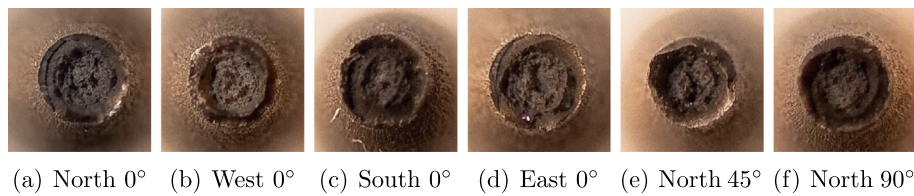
Fracture surfaces from different tensile test specimens.
